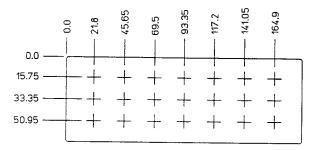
MODULE REAR 21 COMPONENT GRIDWORK, 4 SLOT MODULE
